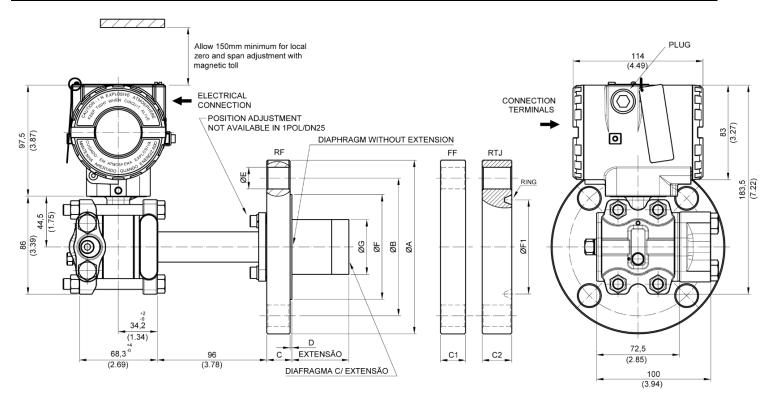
(a) – Dimensional Drawing and Mounting Position - Differential, Flow, Gage, Absolute and High Static Pressure
